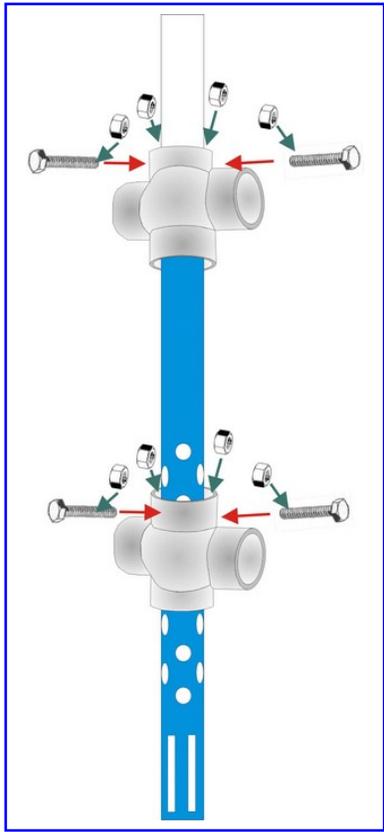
Sketch of a guard-pipe fastened to double tees using a bolt and double-nut holding system
